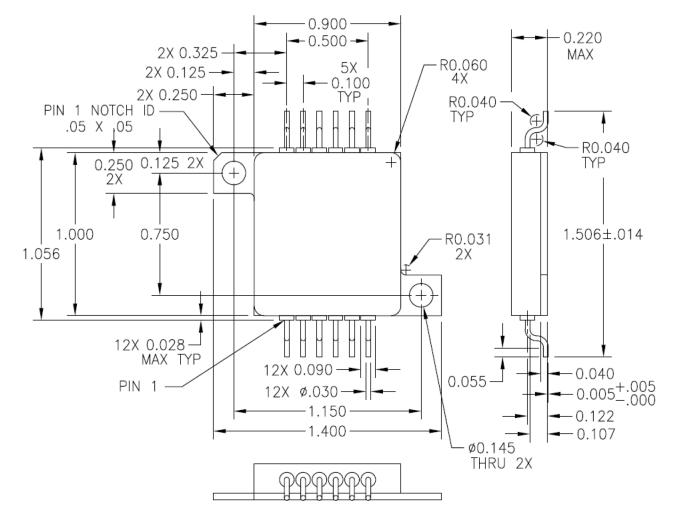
Package Outline – VRG8692 Surface Mount Power Package
